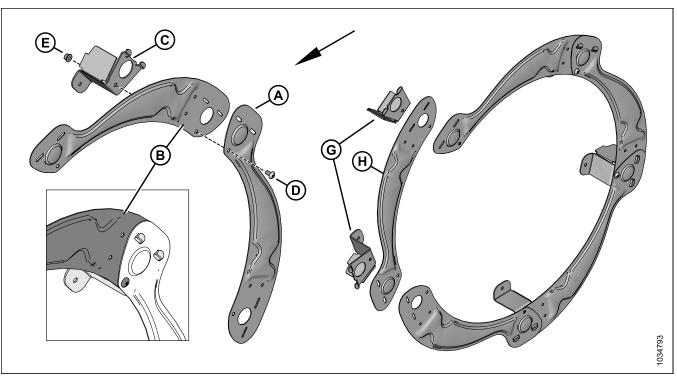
Five-Bat Reel - Initial Endshield Assembly
